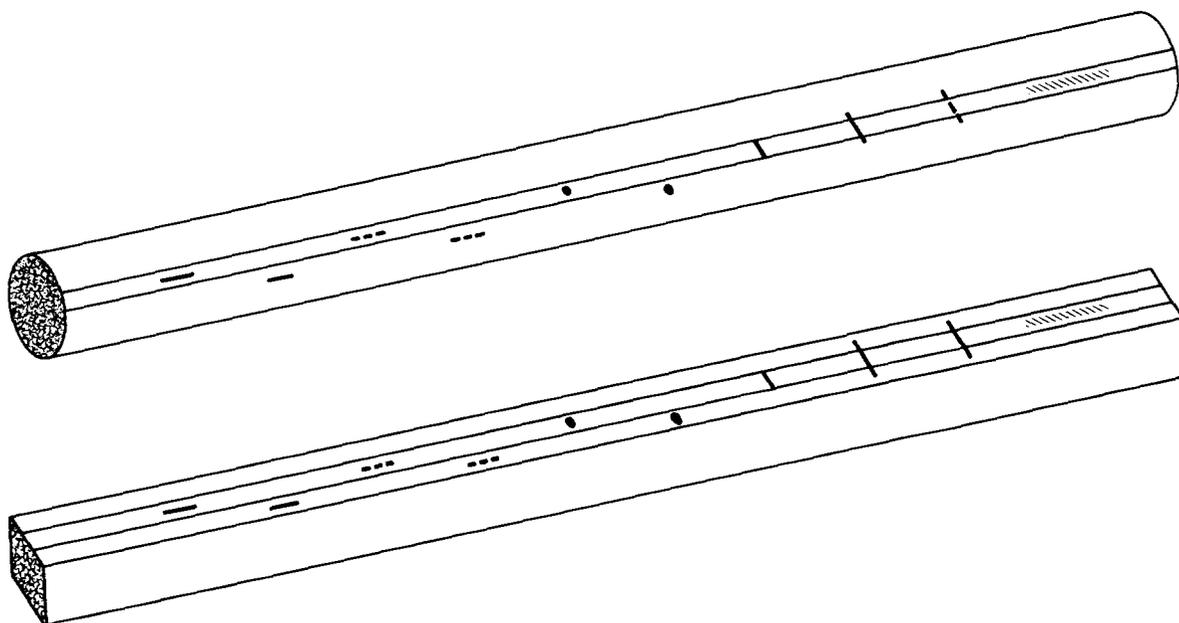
Locations of manufactured discontinuities in the superconductor sheath weld test samples.
